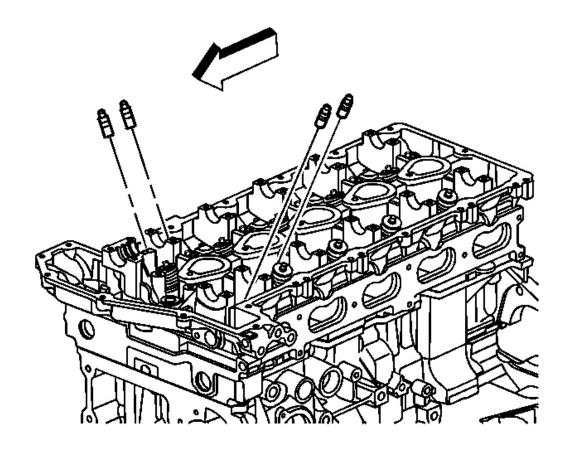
View Of Valve Lash Adjusters Courtesy of GENERAL MOTORS CORP.
